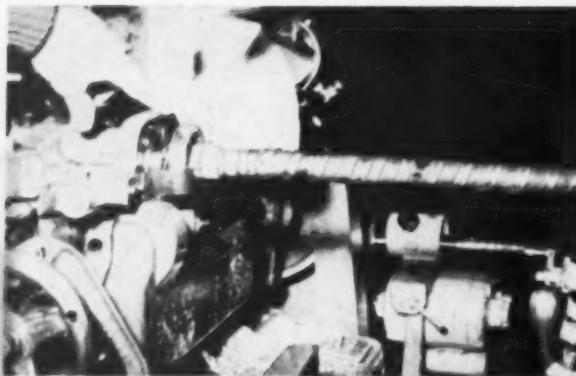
Jarvis flexible shaft type auxiliary drive being used with high speed turret drilling attachment on screw machine
